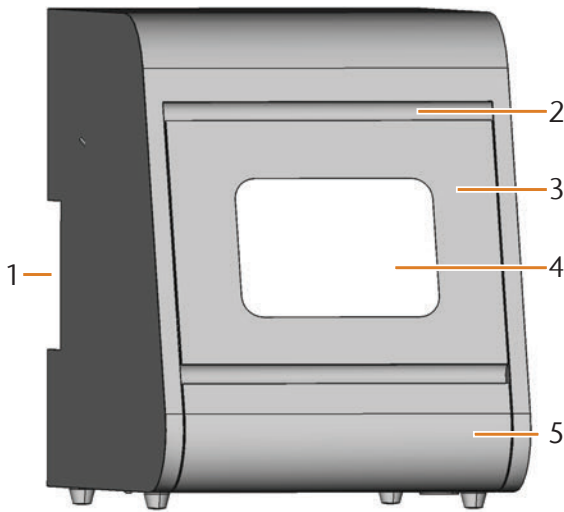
FRONT VIEW OF THE N4 IMPRESSION
